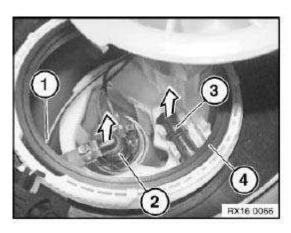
Cable, Lines, Plug Connection And Removal Directions
